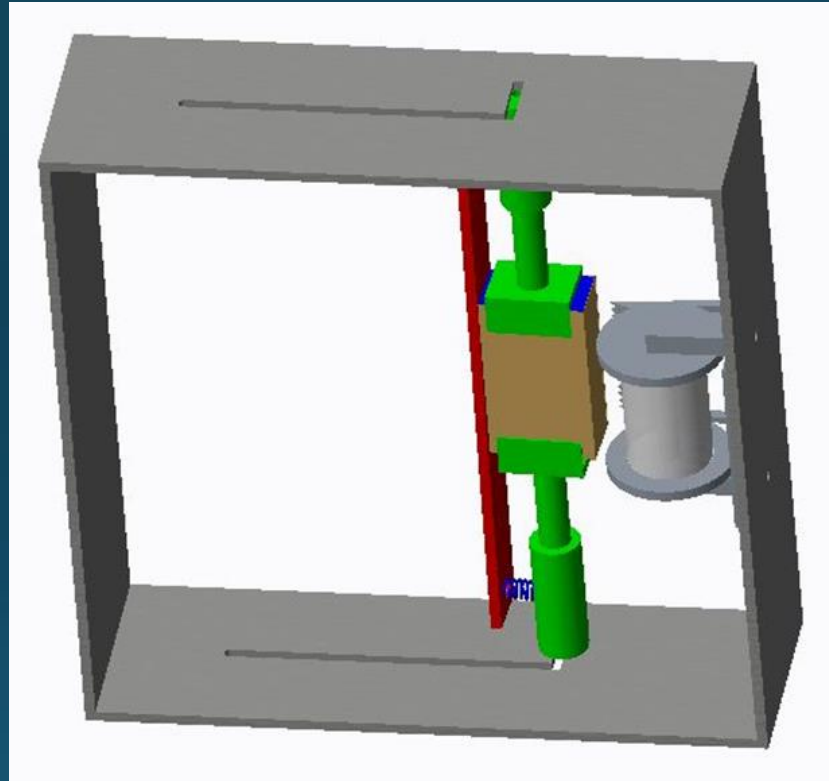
Wrapped capacitor assembly moving backwards to cut tape and finish wrapping process
